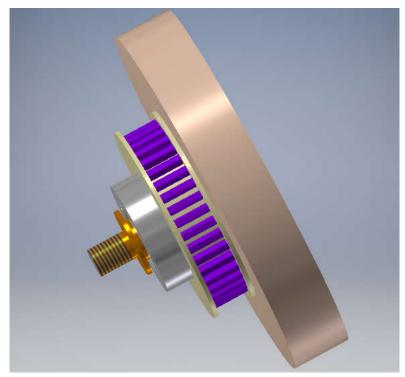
Tooth Wheel (Wheel Shaft)
